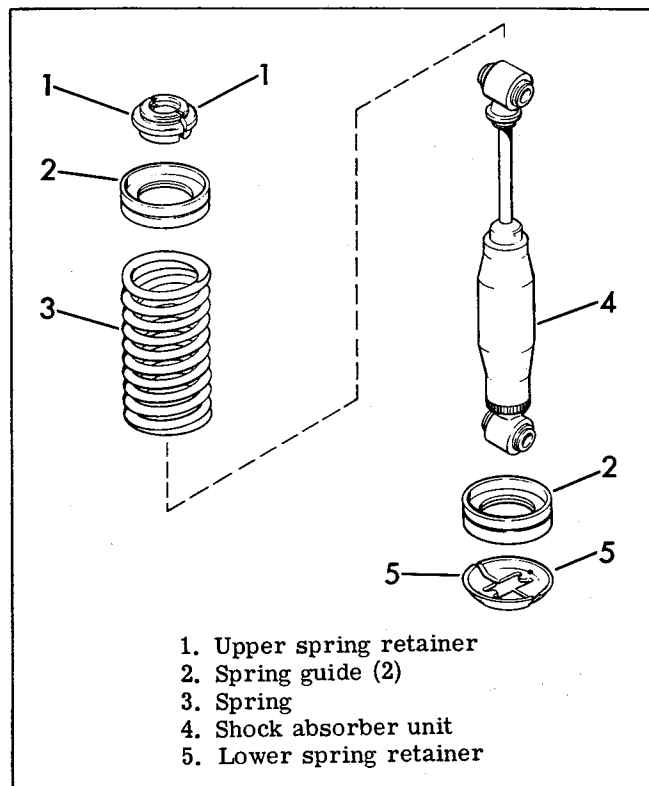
Front Shock Absorber, 4 Wheel Car - Exploded View
